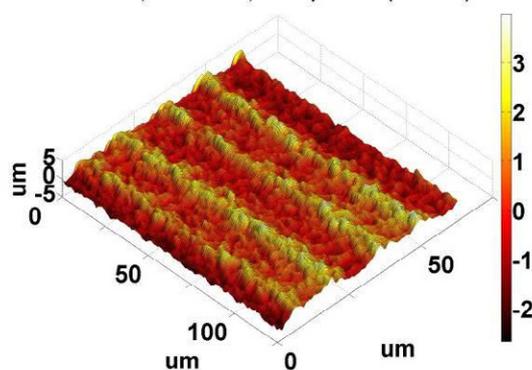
Micro EDM Milling machining with Cu rod 0.2 mm Micro Hole 2.2nF -200V 10000rpm
